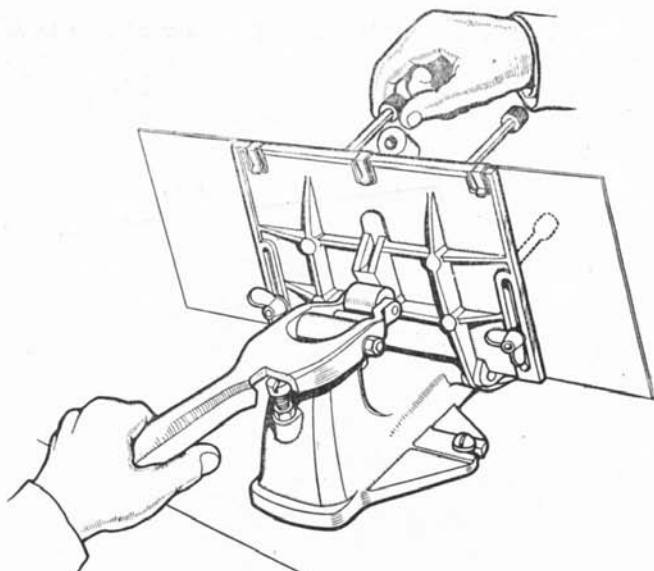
Adjusting the type-bed to the platen. Part of the handle is cut away in the drawing to show the impression control stop on the main frame. The handle must press down hard on this screw, otherwise adjustment of the bed will be inaccurate.
